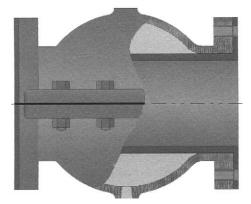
Typical pneumatic/hydraulic pinch valve construction
